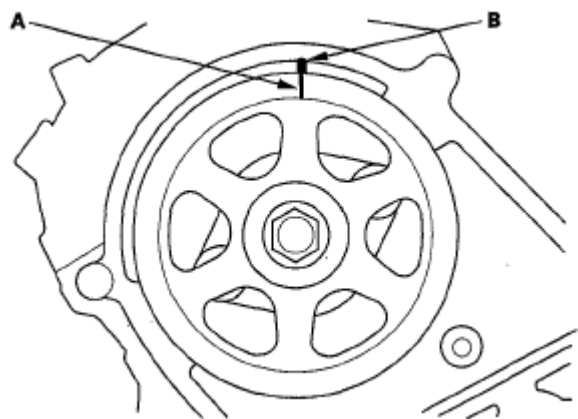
Aligning TDC Marks On Camshaft Pulleys - Rear
